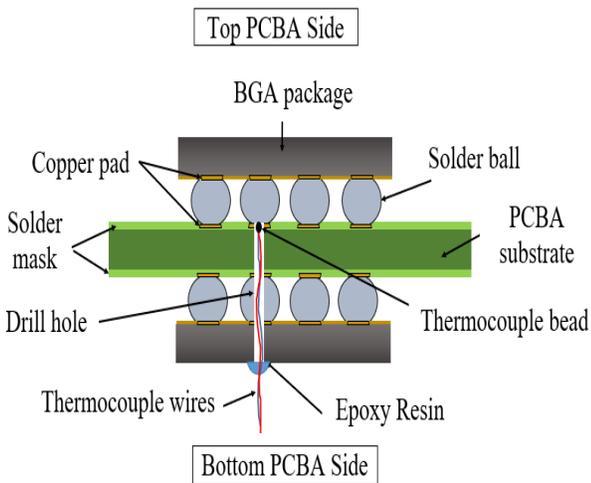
Schematic of thermocouple wire location on BGA solder joint
